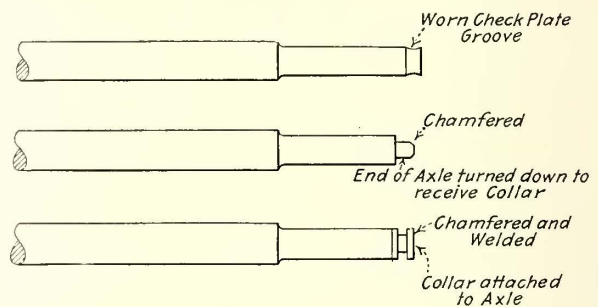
STEPS IN APPLICATION OF CASE-HARDENED COLLAR TO A WELD-REPAIRED AXLE
